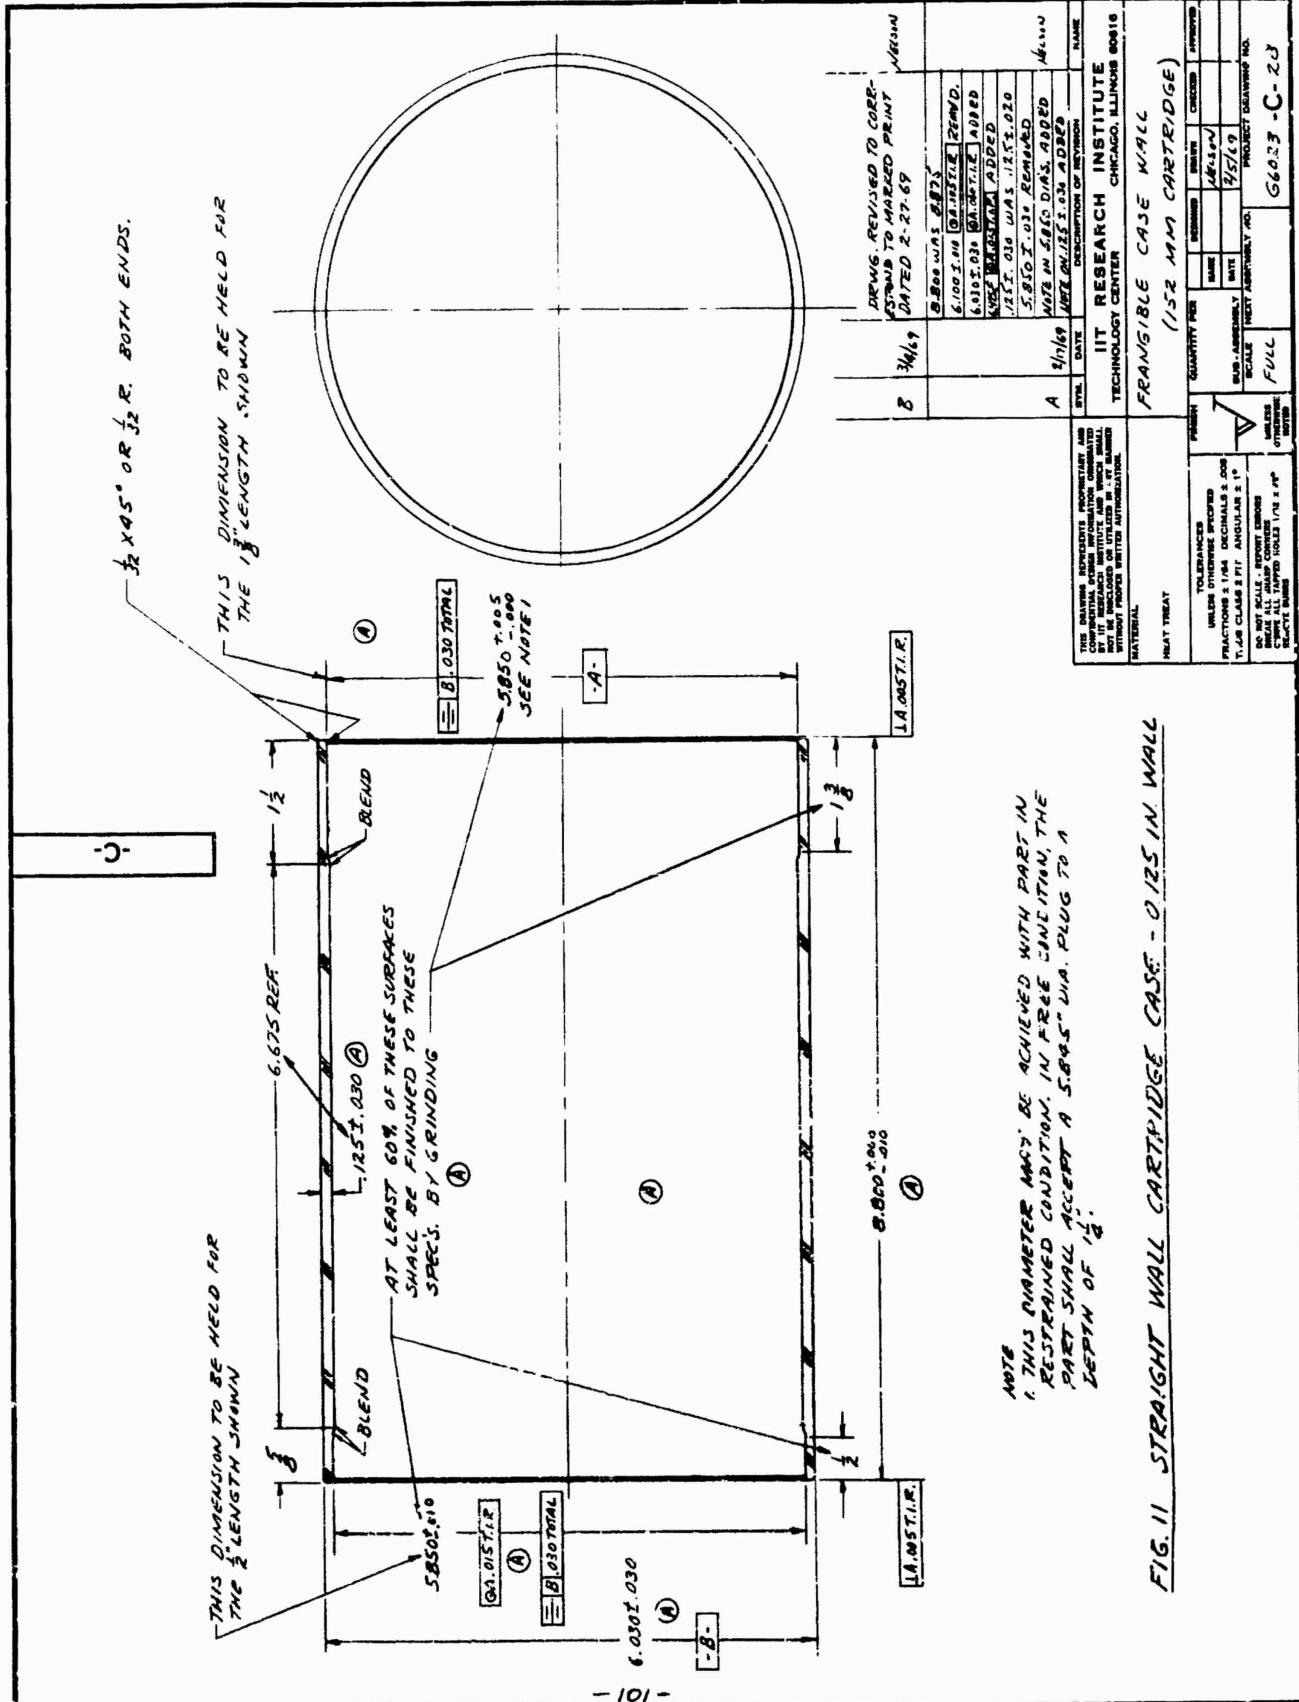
STRAIGHT WALL CARRIAGE CASE - 01251N WALL
